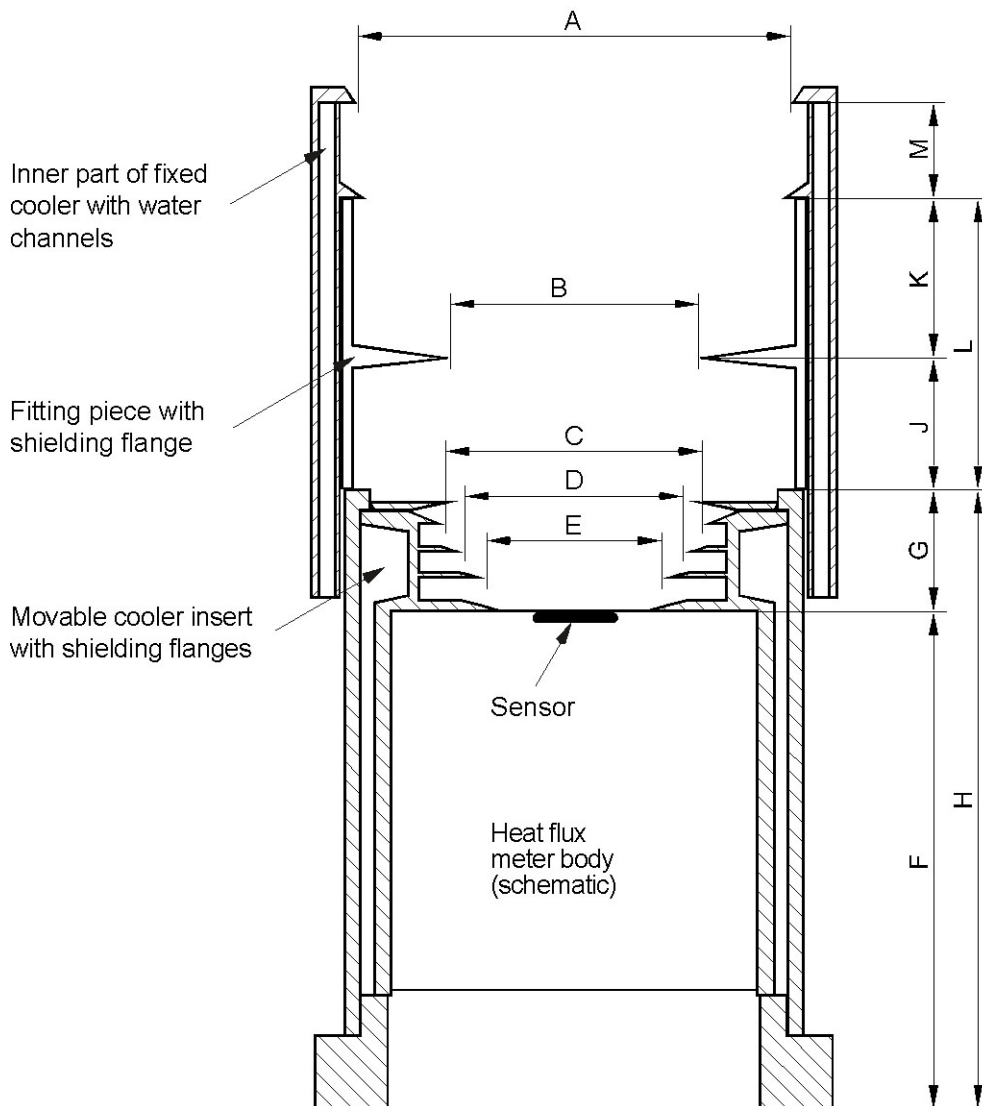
Controlled dimensions of fixed and movable cooler
